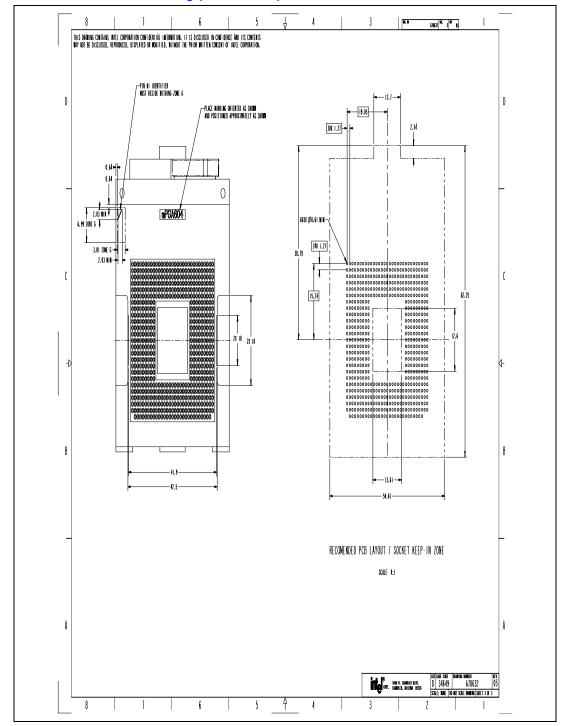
603-Pin Interposer Assembly Drawing (Sheet 1 of 7)
